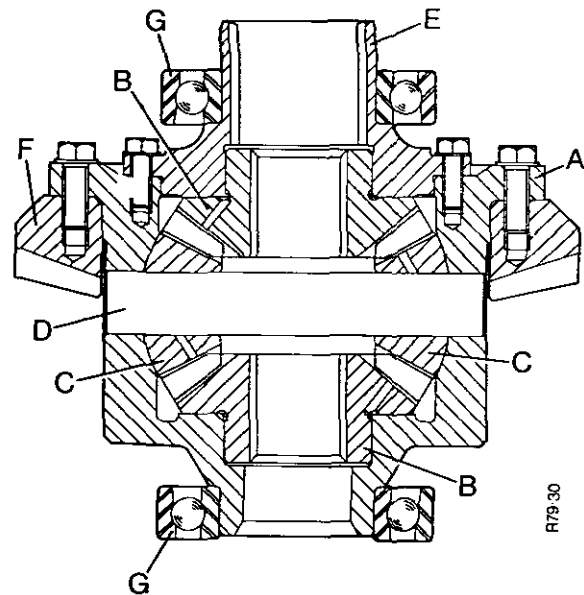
DIFFERENTIAL UNIT ASSEMBLED
